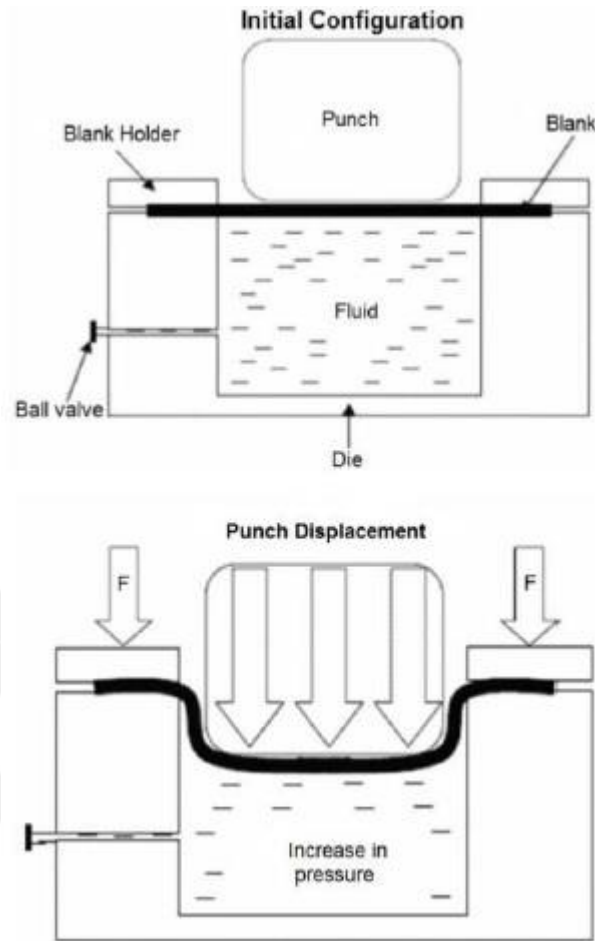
Showing cup forming by using hydro-mechanical deep drawing [29].
